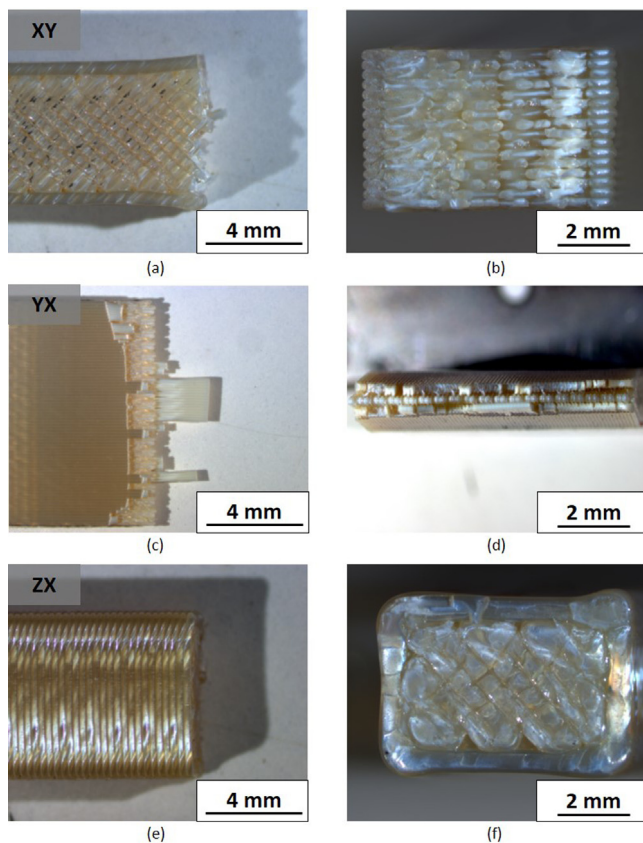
Fractographs of the baseline tensile specimens. (a) Side and (b) cross sectional view of XY specimen. (c) Side and (d) cross-sectional view of YX specimen. (e) Side and (f) cross-sectional view of ZX specimen.
